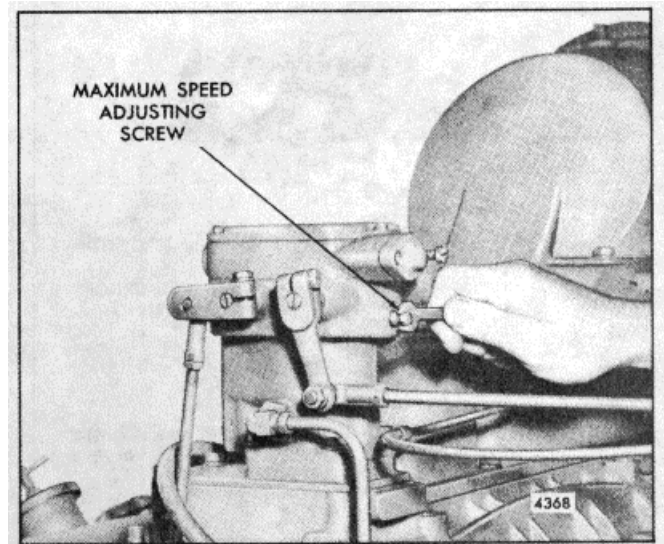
Adjusting Maximum No-Load Engine Speed
